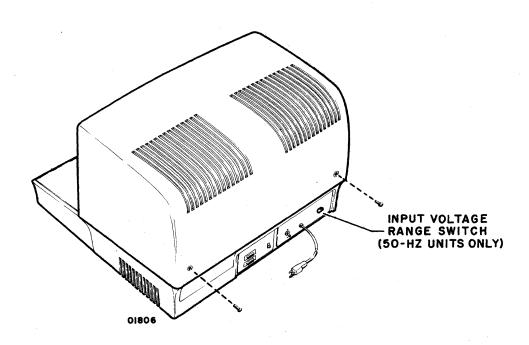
Cabinet Hood Removal and 50-Hz Voltage
